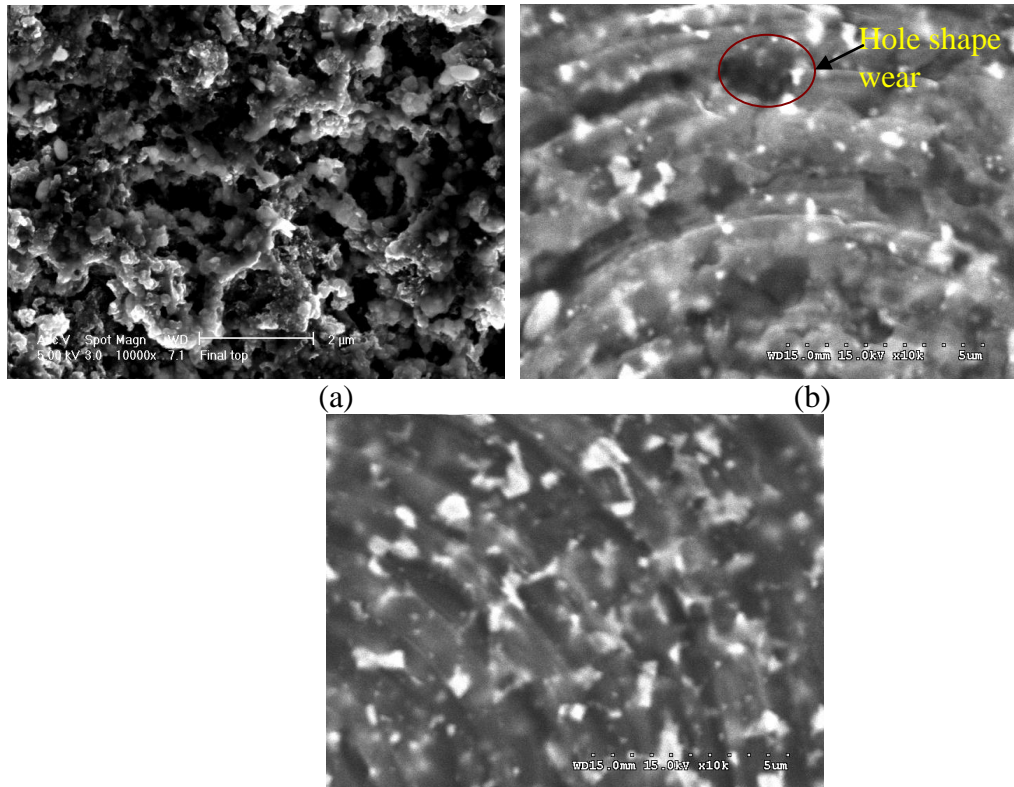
2: Bottom surface of tool (a) before machining (b) after machining.
